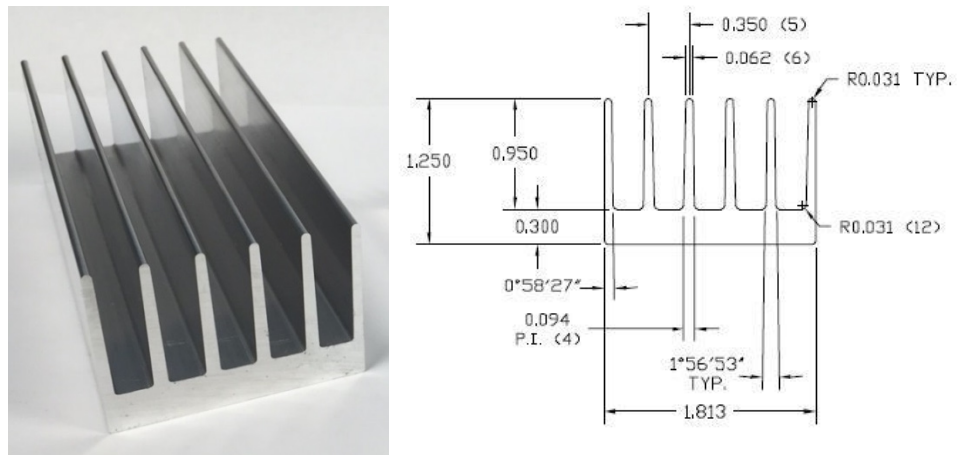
Heat Sink Photograph (Left) and Profile Dimensions, in Inch (Right)
